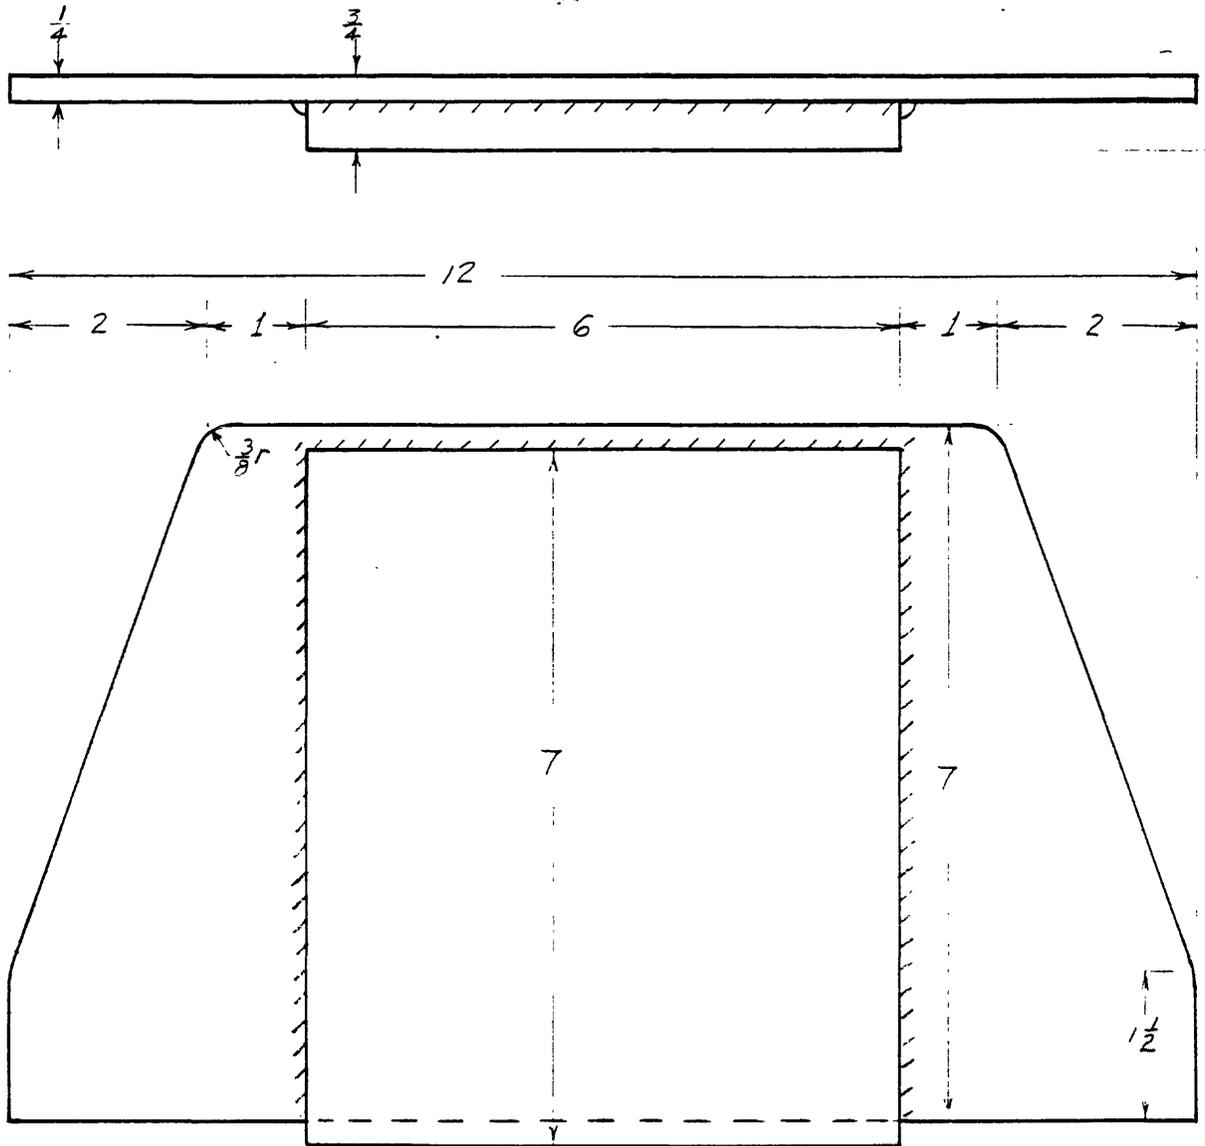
Assembly drawing of spiked-base, shear-wave source. All dimensions in inches.
